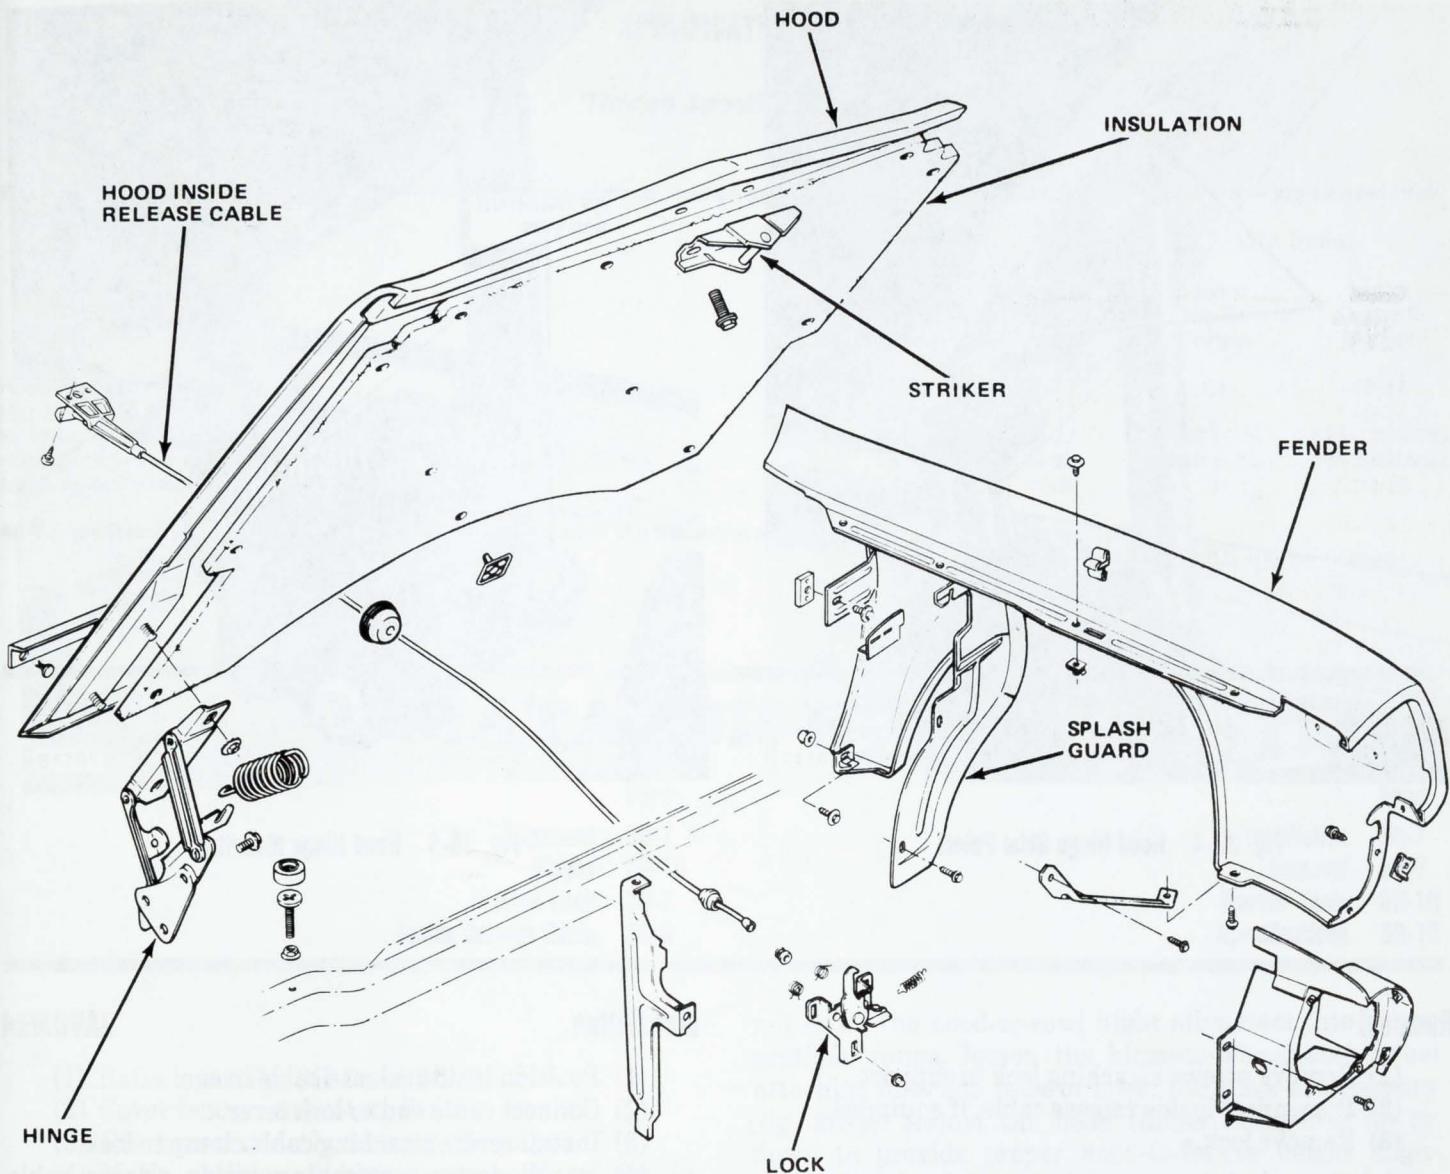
G-3 Front Fender and Hood Components—Concord-AMX
